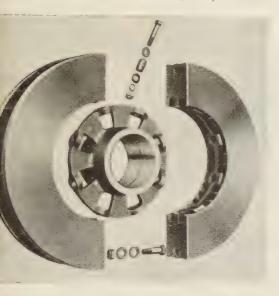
Cast iron brake disc with free expansion on steel hub. Type with 2 piece friction rim. Above: tubular spoke with elastic shrinkage; below: bolt for assembling the two halves of the rim.
